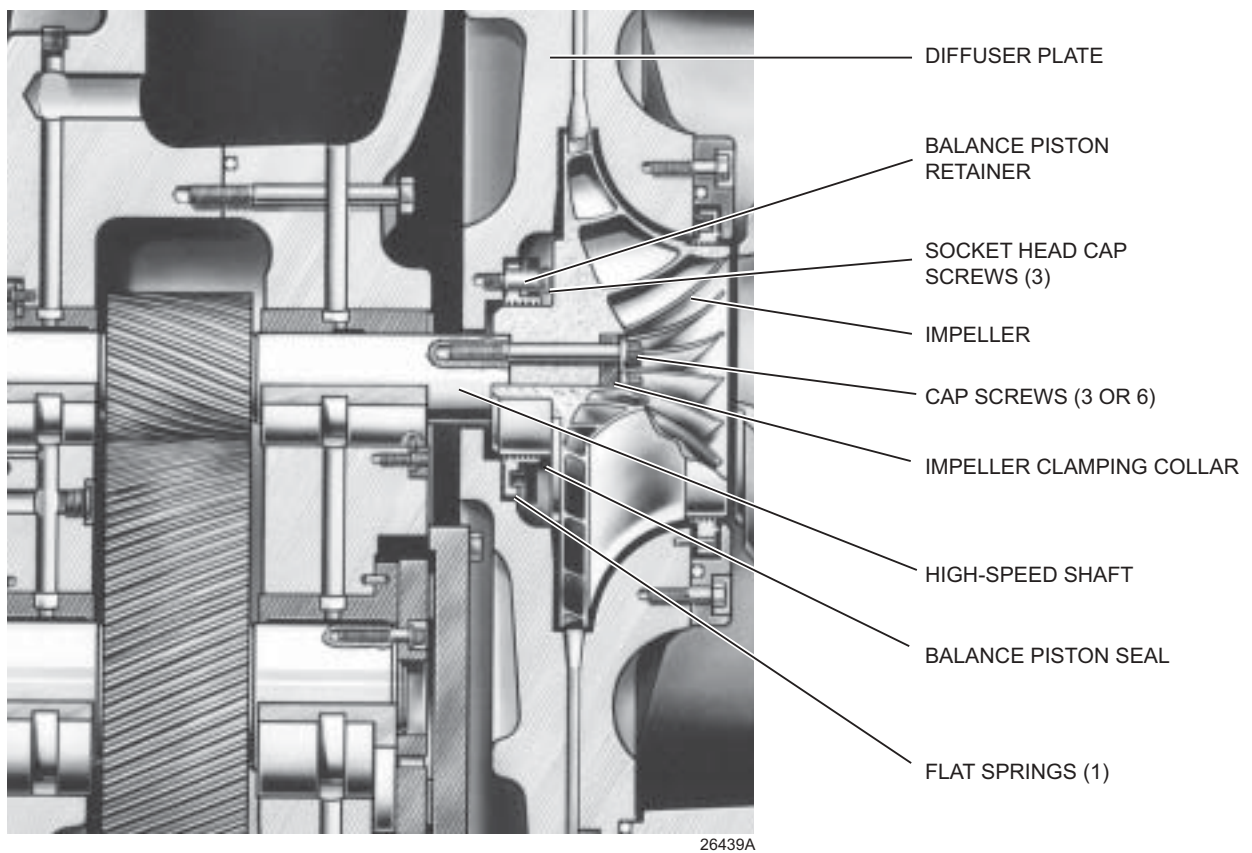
IMPELLER AND BALANCE PISTON (IMPELLER SIZES 46 AND LARGER)
